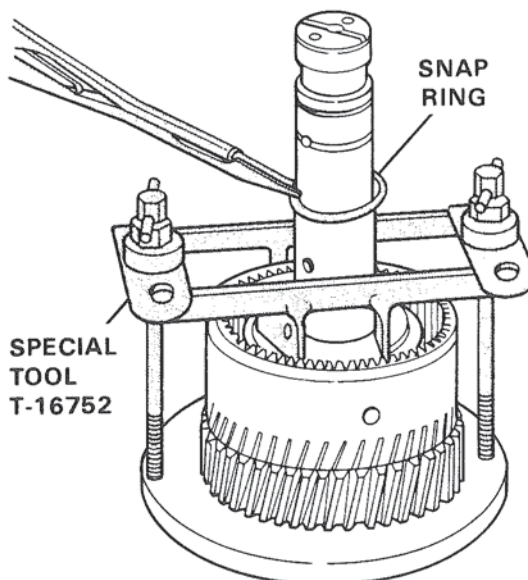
Removing Pinion and Thrust Bearing Assembly.
